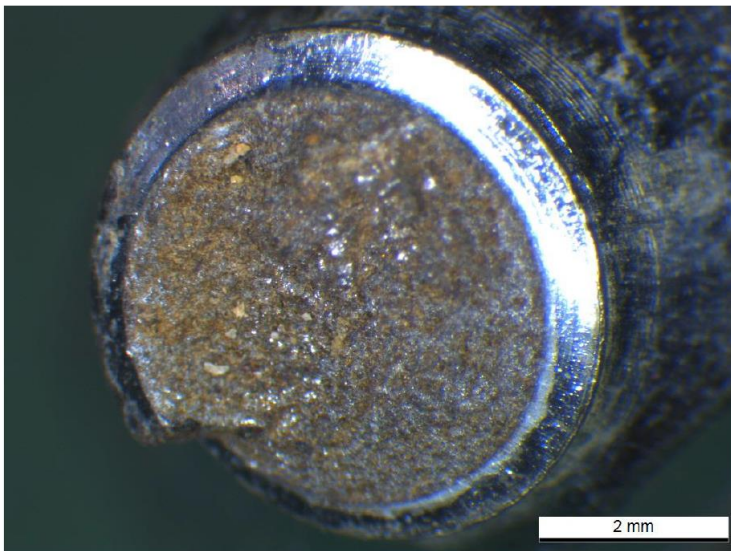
Forward left hand steering rod fracture surface with signs of surface corrosion.
